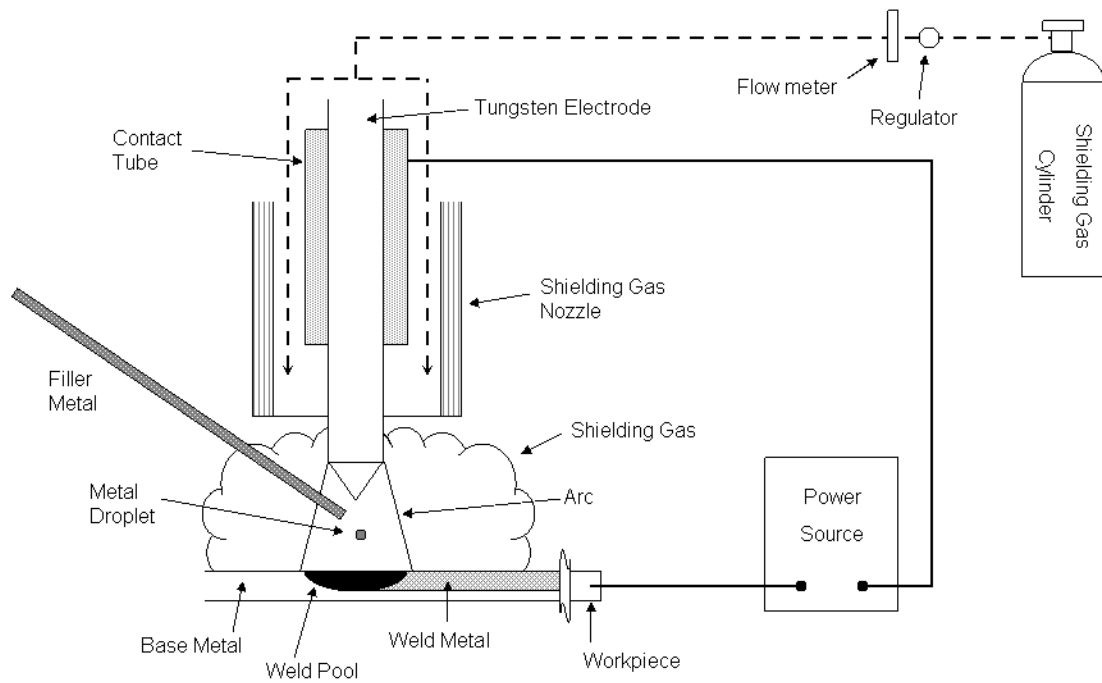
Schematic diagram of GTAW apparatus showing important parameters. Tungsten electrode, shielding gas nozzle and contact tube are actually contained inside the weld torch.
